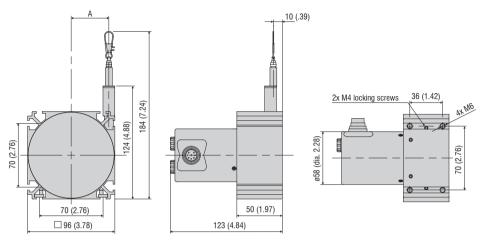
Dimensional drawing WDS- ... - P96 - SR - U/I, dimensions in mm (inches)
